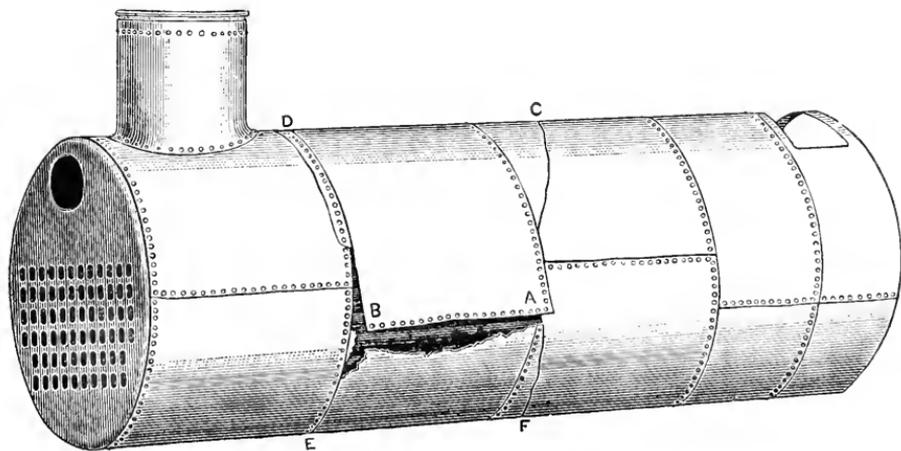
BA, line of initial fracture; AC, AF, BE, and BD, lines of secondary fracture, being the boundary lines of the detached ring of plates.
